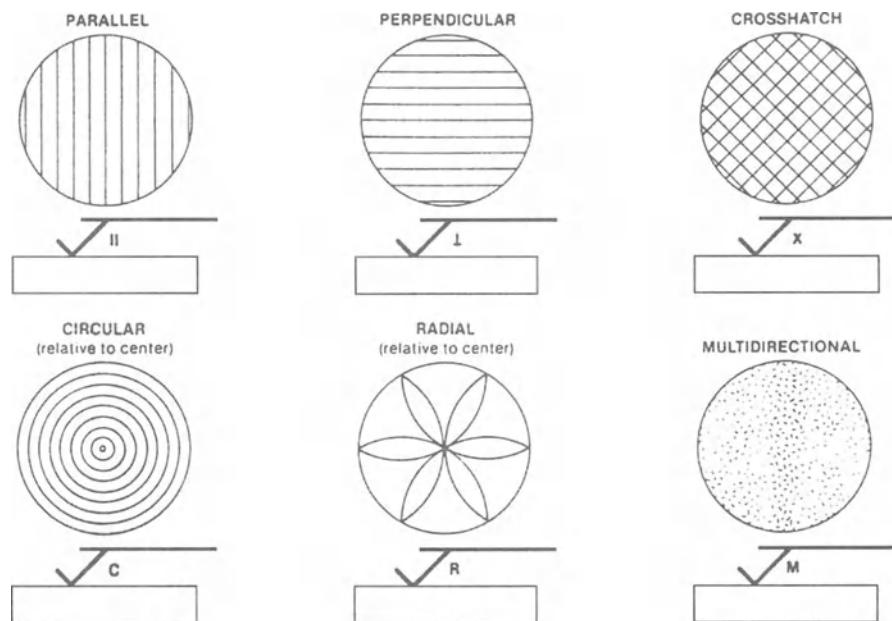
Symbols use on mold drawings to indicate the lay pattern for polishing mold cavities, etc.
